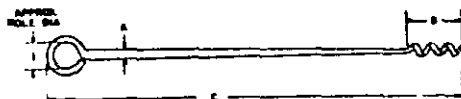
Type I, Class 2 stuffing box and pump packing extractor, screw and rigid shaft.
